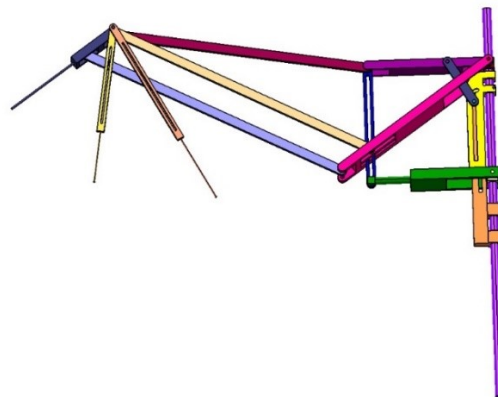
Fully expanded view of the folding mechanism after assembly of the folding mechanism and the locking mechanism.
